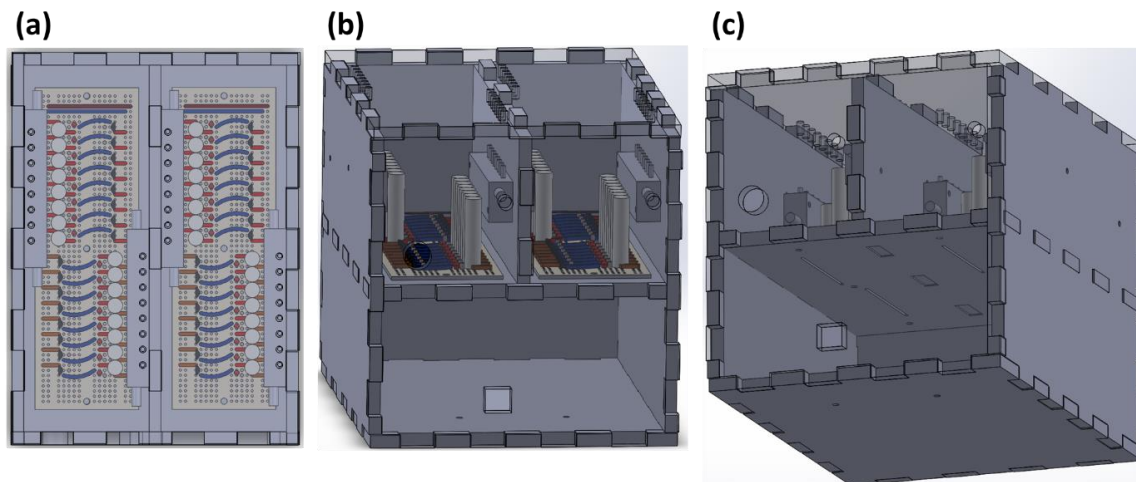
Electronic circuit and its housing to operate the solenoid valves. (a) Top view of the housing with the protoboards and the solenoid valves. (b) Isometric view of the housing, with emphasis on the bottom, which stores the Arduino microcontroller board. (c) Isometric view of the housing, showing holes for connections of the solenoid manifolds to vacuum tubing.
